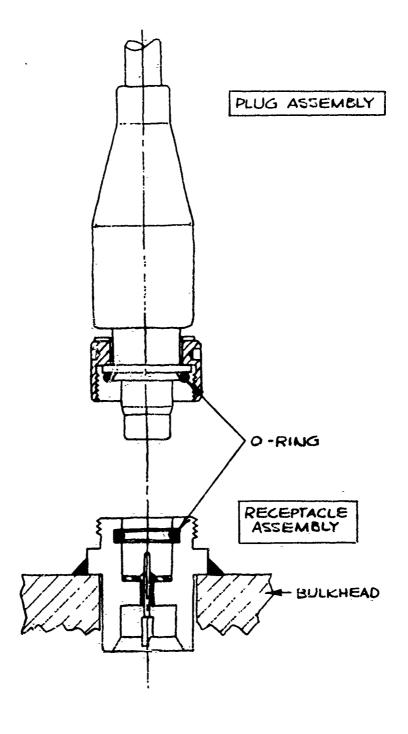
Plug and Receptacle Assembly O-Ring Locations
